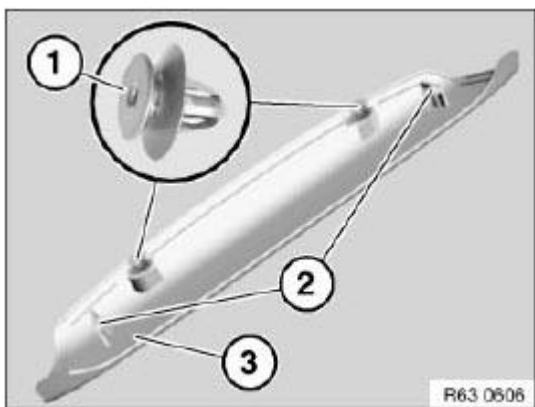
Identifying Auxiliary Brake Light, Clips And Locators
